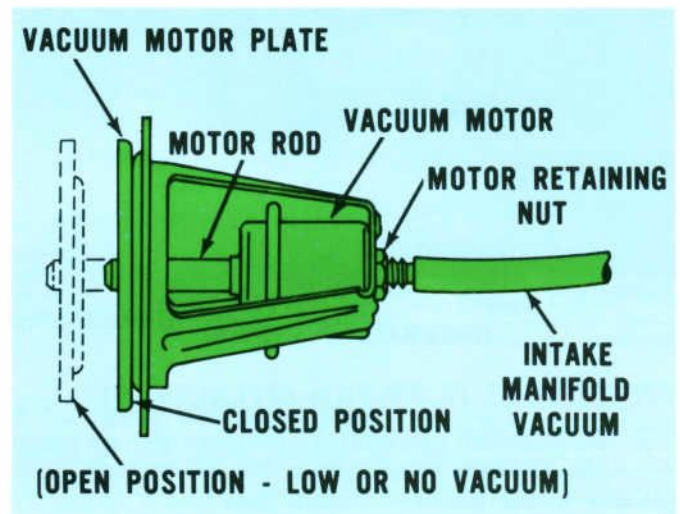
AIR VALVE AND VACUUM MOTOR ASSEMBLY
